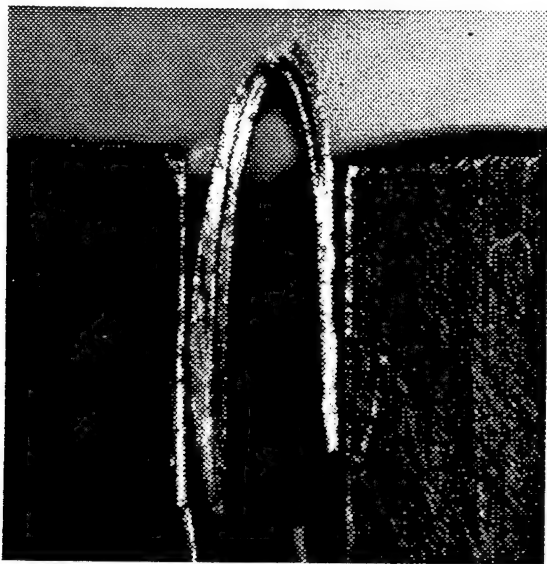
Bend Test Specimens from First Coating on Carbon Steel Sleeve with Horizontal Grit-Blasting Pattern.
